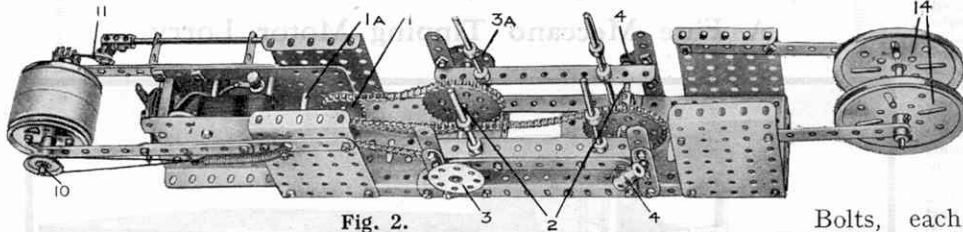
Semi-plan view of the Power Press, with die platen removed to show drive from Motor.
